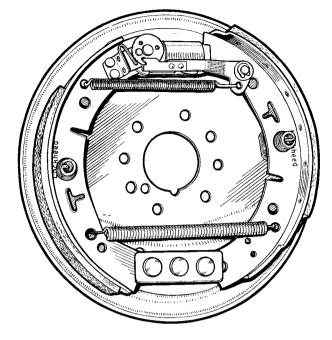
The left-hand rear brake assembly (the right-hand assembly is assembled the opposite way round).
